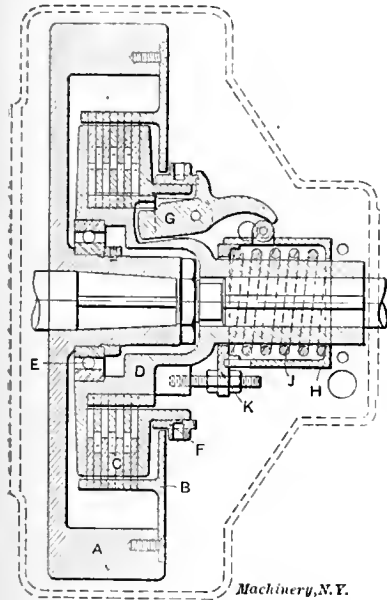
Detail of Clutch, showing Engaging Mechanism and Provision for Oil Bath
